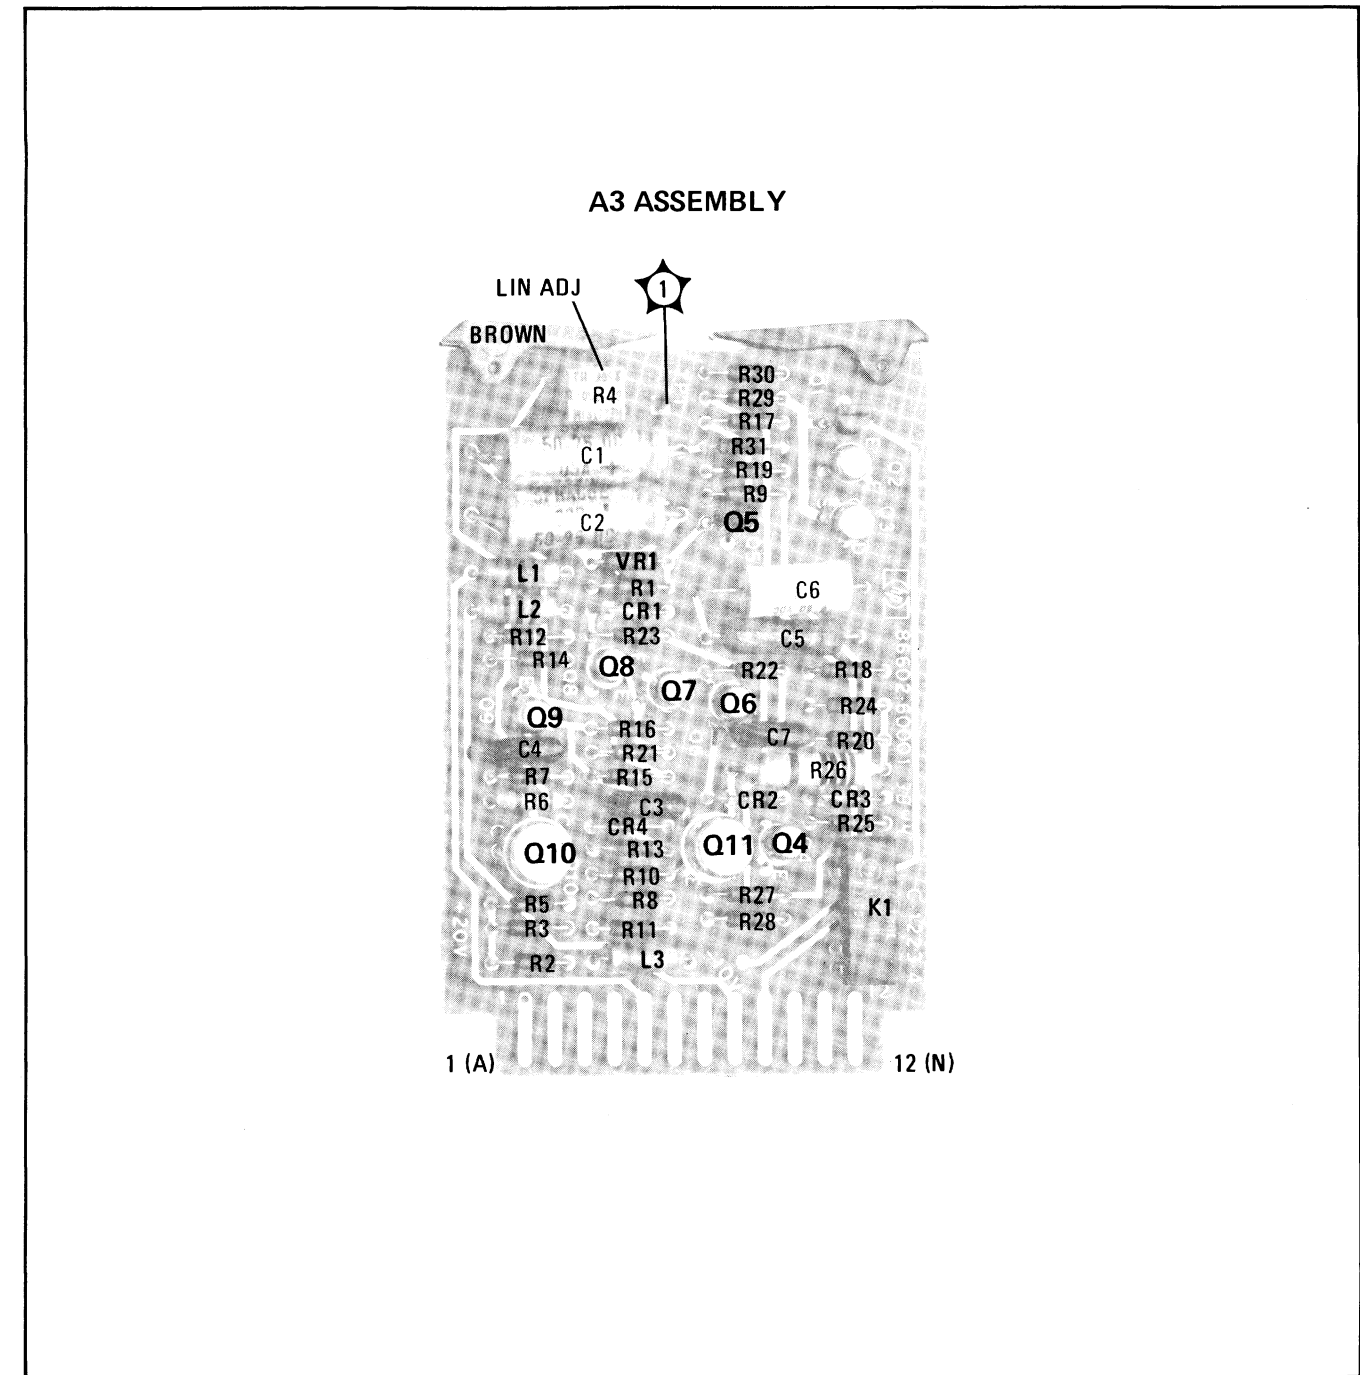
A3 ALC Amplifier Assembly Component and Test Point Locations
